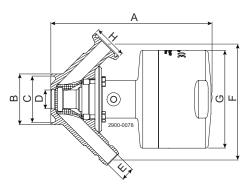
Pneumatic with valve body: Collared pipe welding
